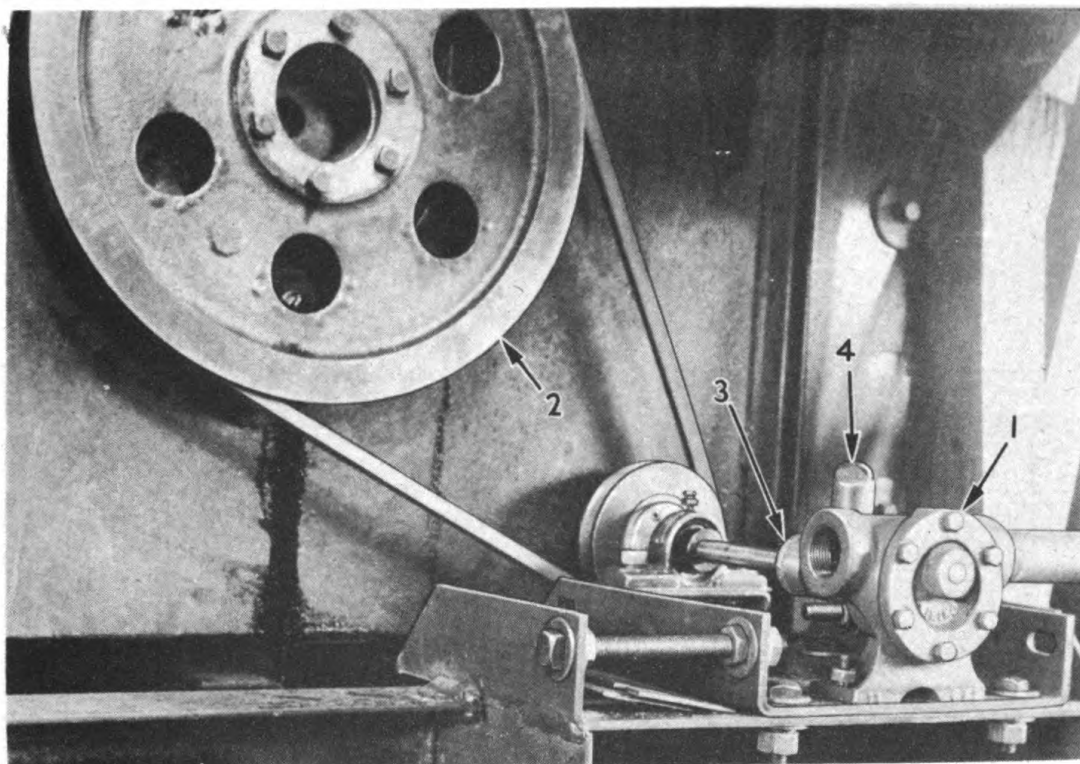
DRYER FUEL PUMP ASSEMBLY.
